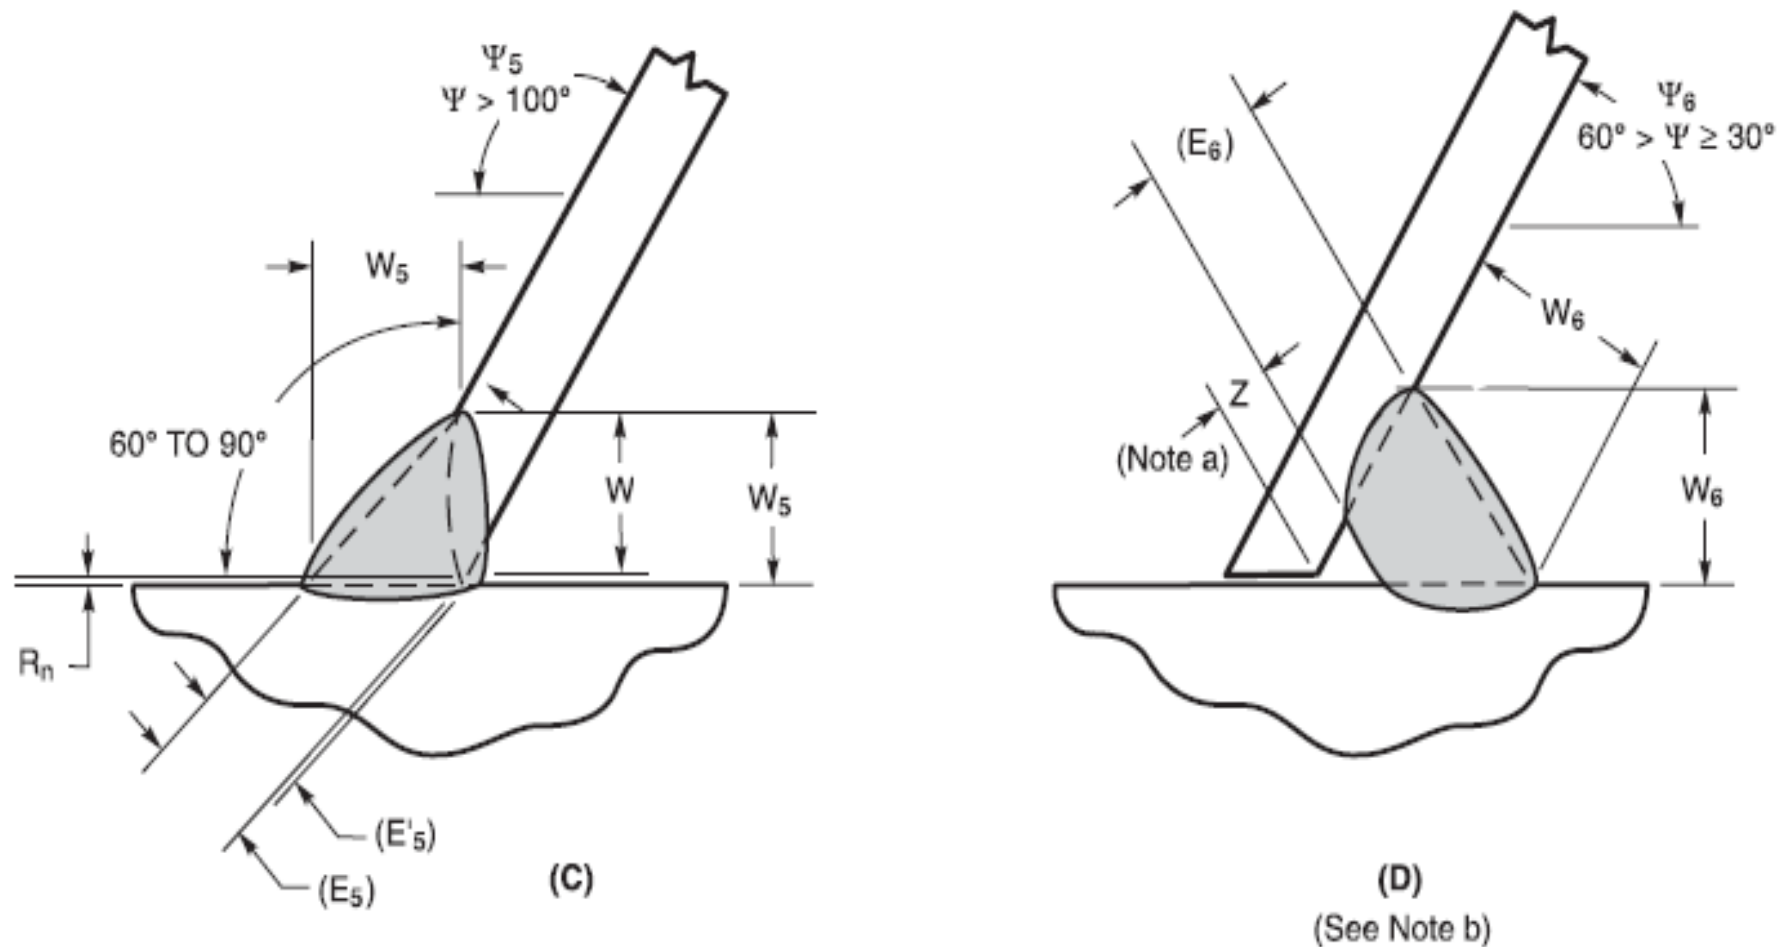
(Continued)—Prequalified Fillet Weld Joint Details
